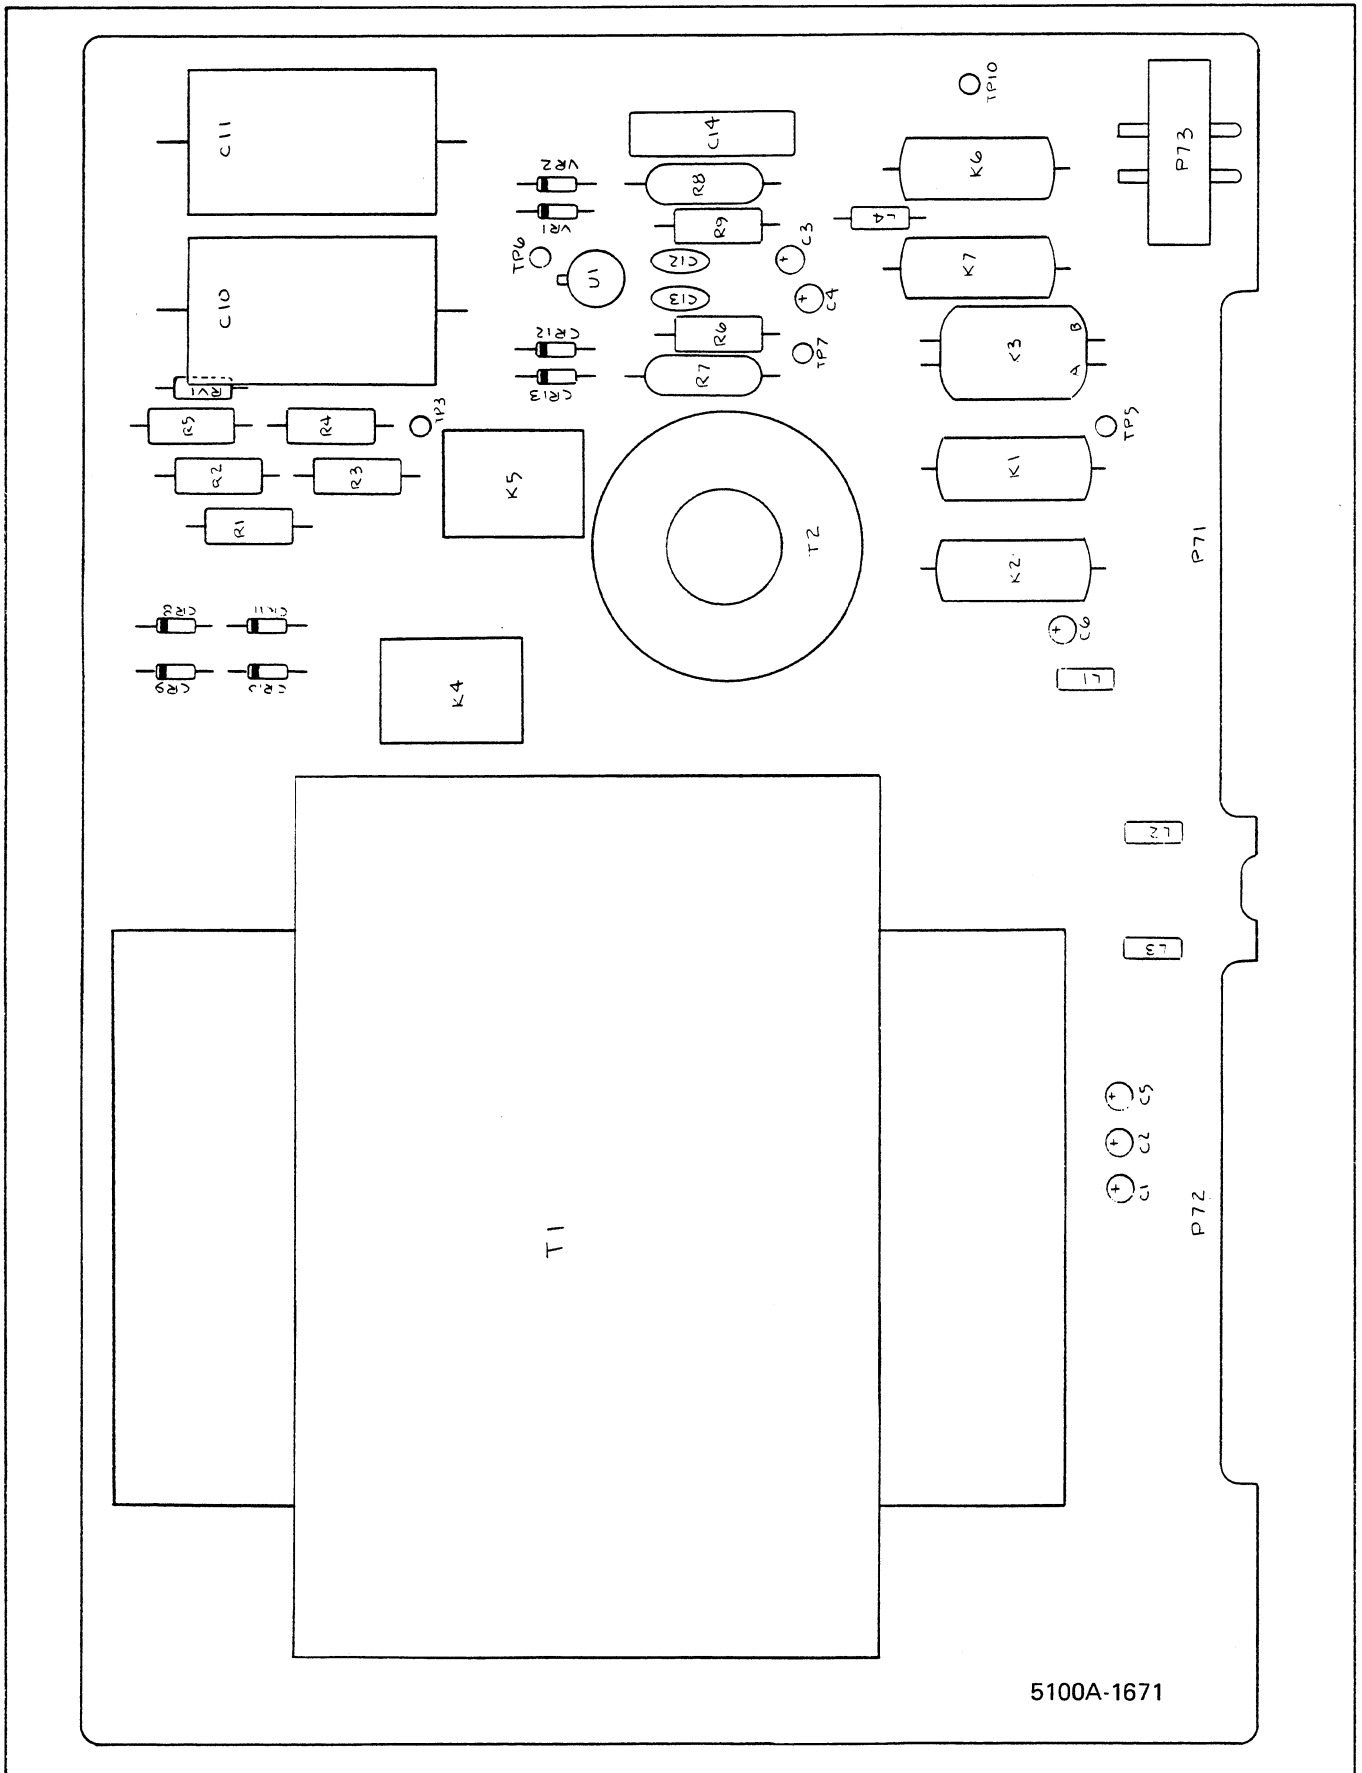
A16 Extended High Voltage PCB Assembly, Non-Environmental Case
